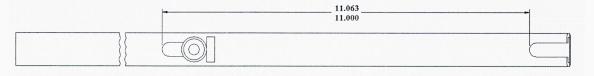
Keyway dimensions – typical for low and high beam assemblies
